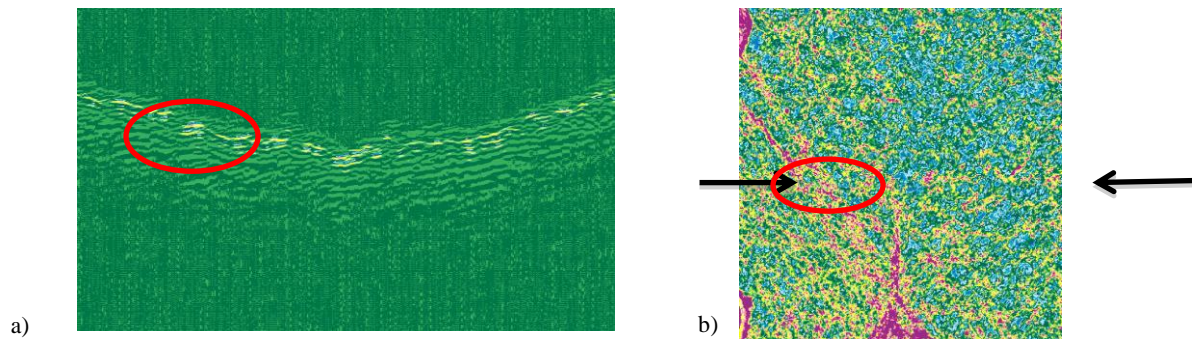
B-scan (a) and C-scan (b) images of the damaged area of the specimens 2. B-scan shows cross section of C-scan marked with arrows
